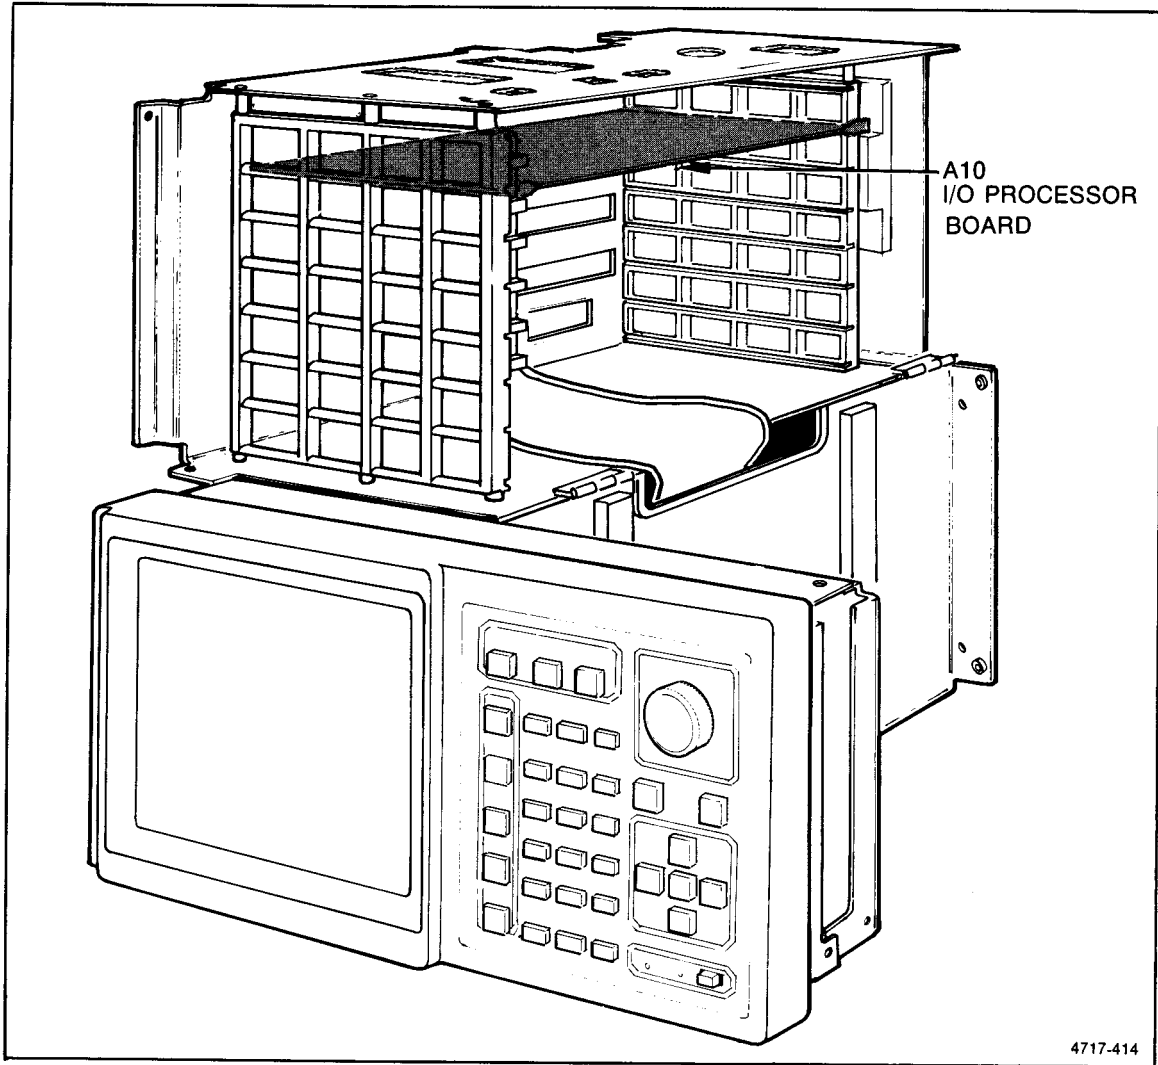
A10 I/O Processor Board Card Cage Location.
